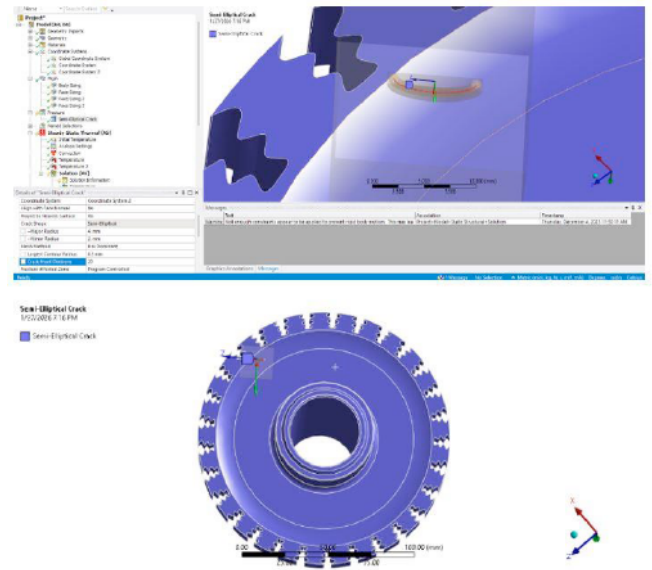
Modeled crack in ANSYS and its application to the turbine disk based on the geometry and dimensions extracted from the real inspected specimen.
